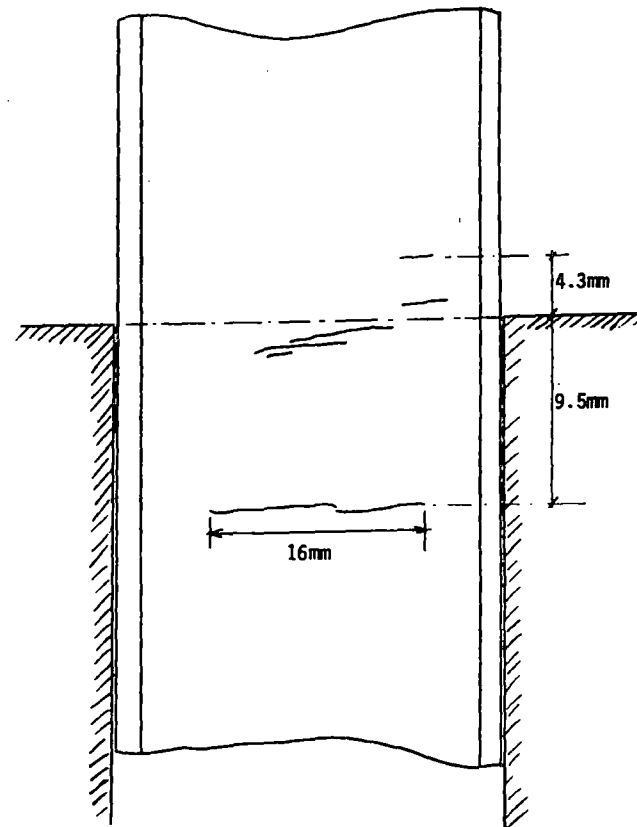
Expansion Transition Cracks at Dampierre 1
